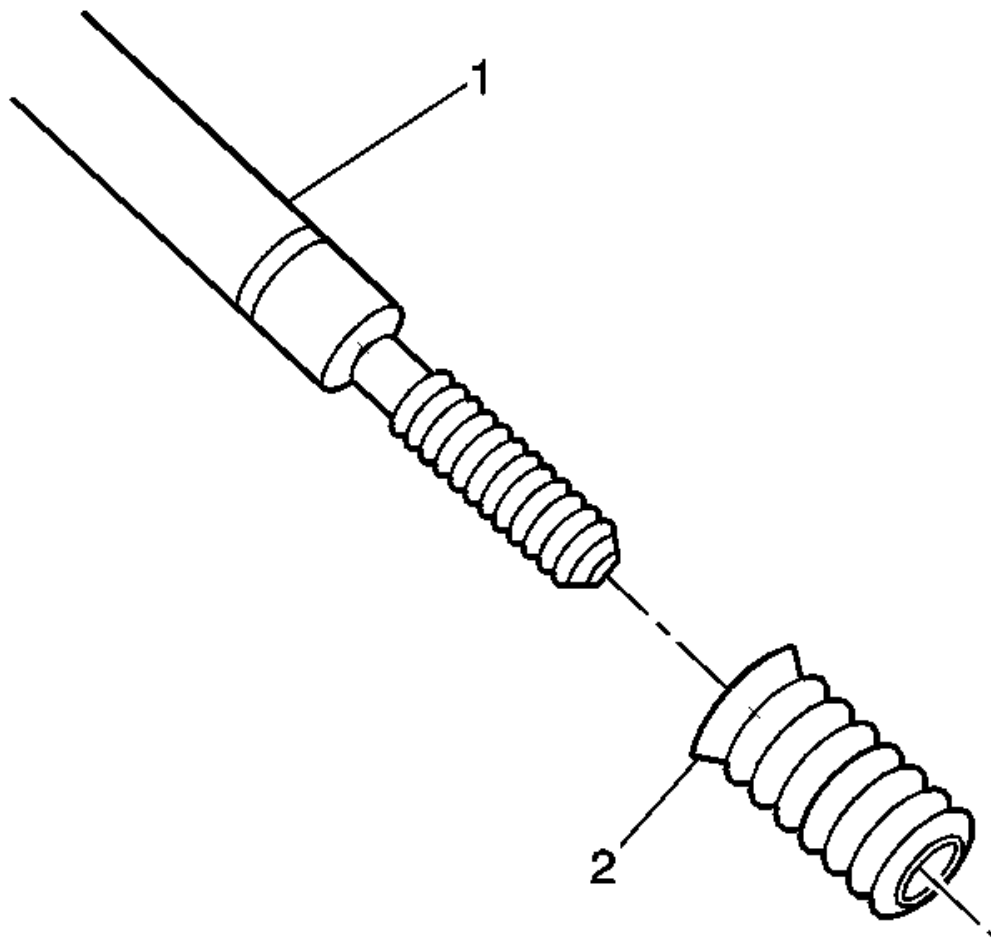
Lubricating Installer Tool Using Driver Oil
